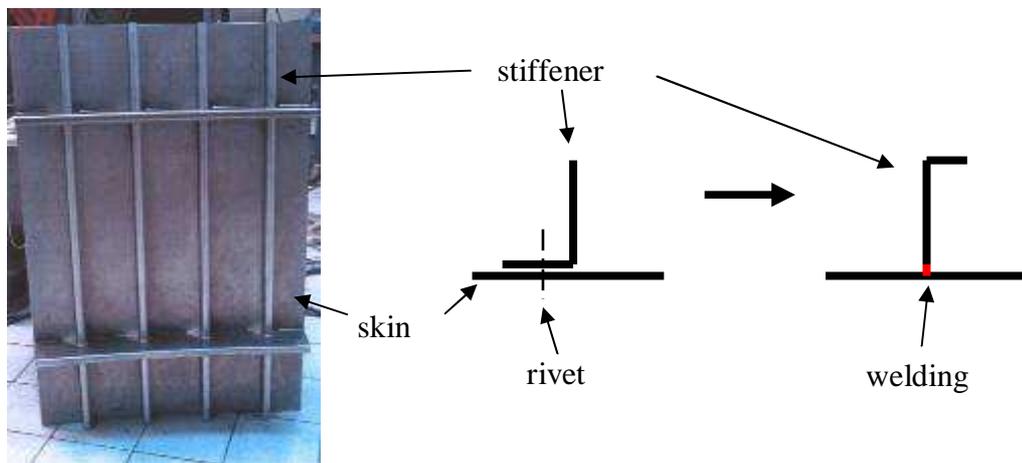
Metallic structure with riveted or welded stiffener.
